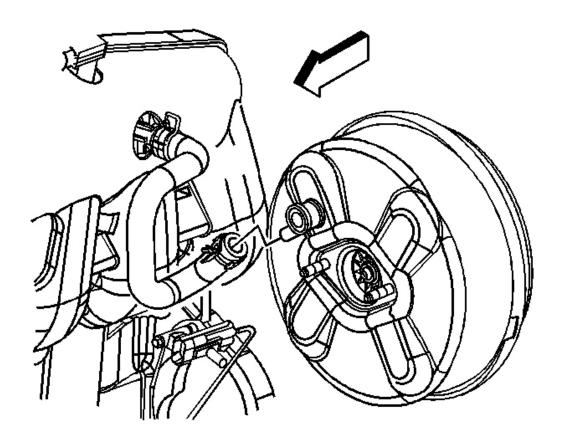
View Of Vacuum Brake Booster Hose Courtesy of GENERAL MOTORS CORP.
